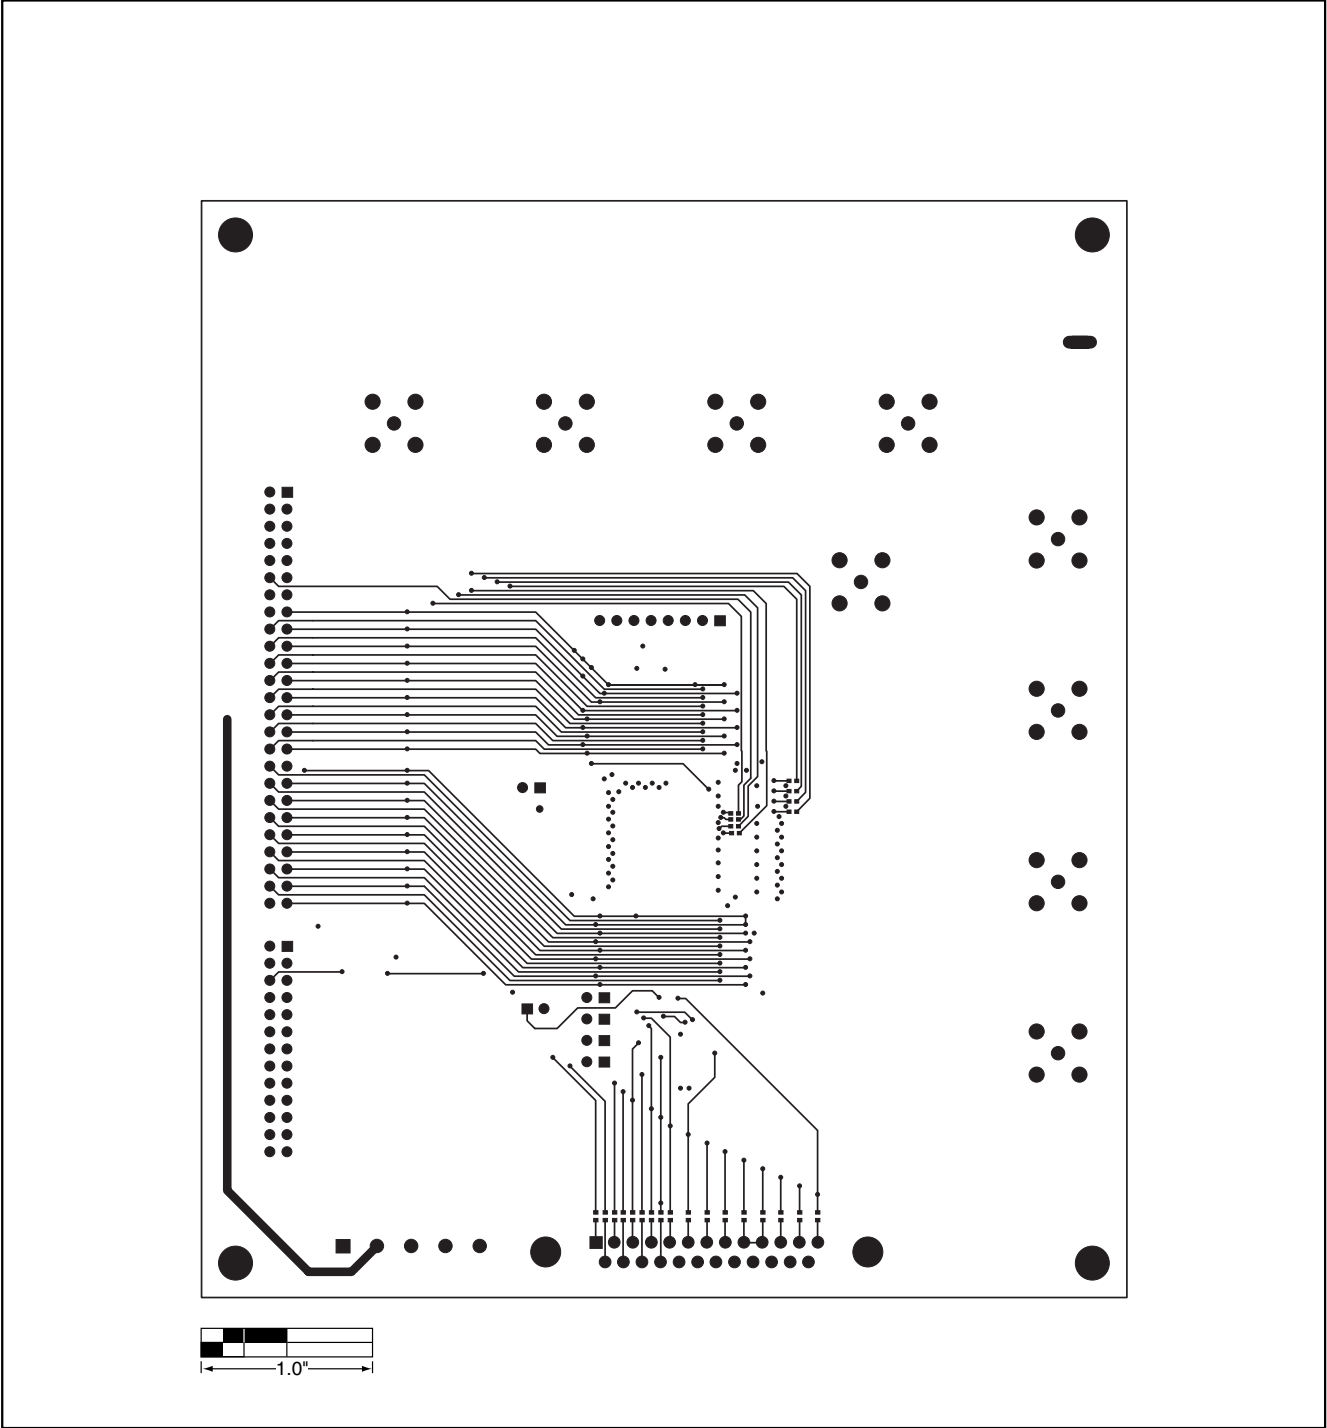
MAX4358 EV Kit PC Board Layout—Layer 4
